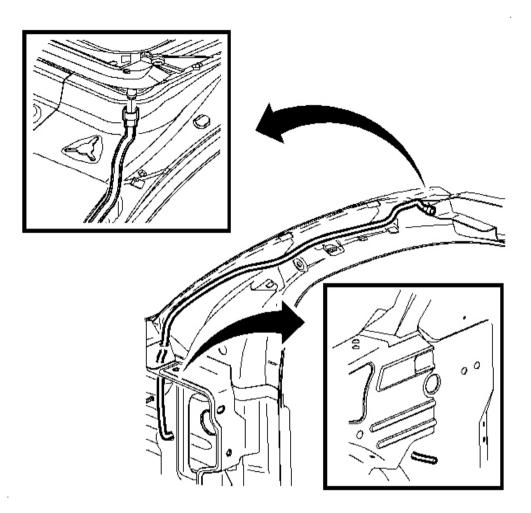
View Of Sunroof Drain Hose Courtesy of GENERAL MOTORS CORP.
